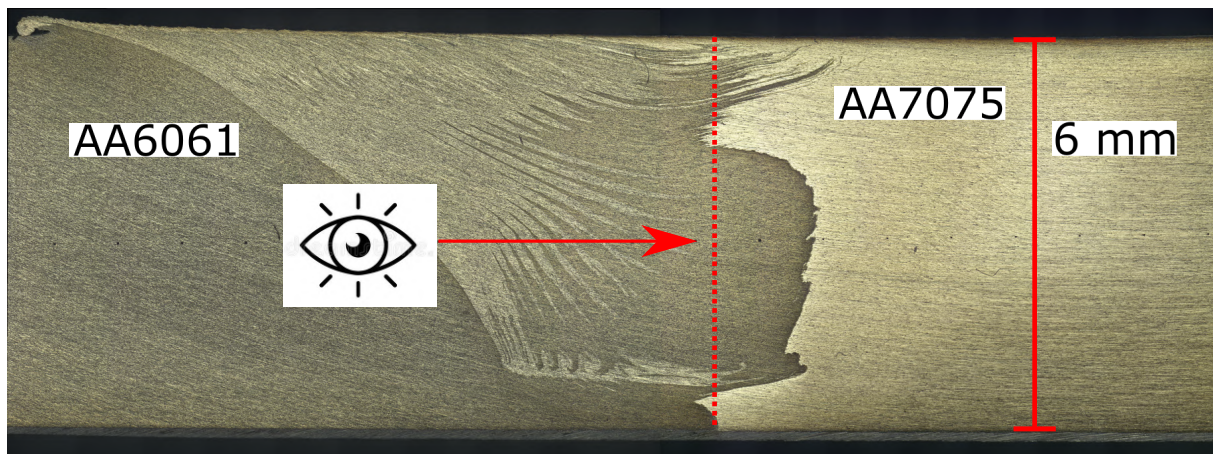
Macrograph illustrating the point of view from which the unusual fracture surface is extracted, see Figure V.13. The sample has broken exactly at the middle on the weld, in line with the remnant observed at the bottom of the weld.
